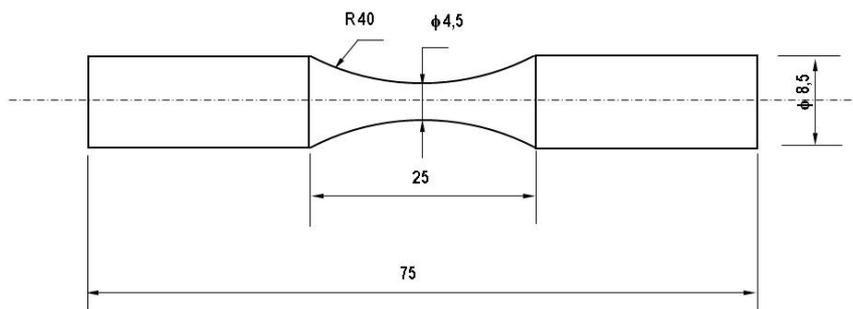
Geometry and dimensions (mm) of the fatigue test specimens
